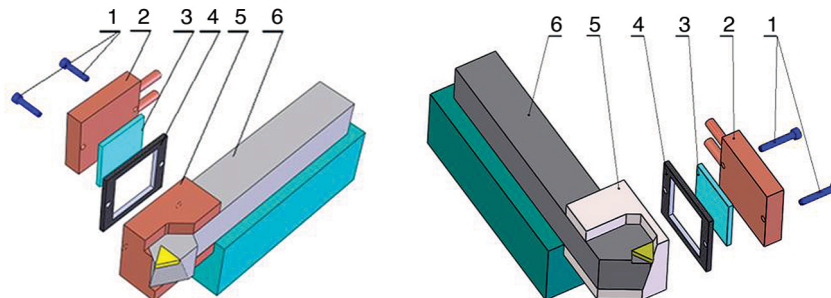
(a) Tool cooling system with TEM, at the back side of tool holder, (b) tool cooling system based on TEM, fitted onto the main back surface: 1-screws, 2-coole li-201, 3-TEM, 4-thermal insulation, 5-insert piece 6 tip holder
